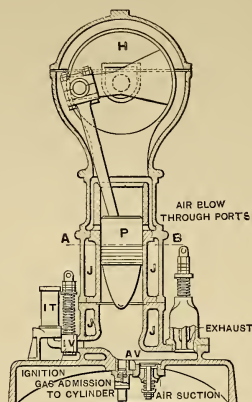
VERTICAL SECTION OF THE PALATINE GAS ENGINE, BUILT BY THE PALATINE ENGINEERING CO., LIVERPOOL, ENG.
